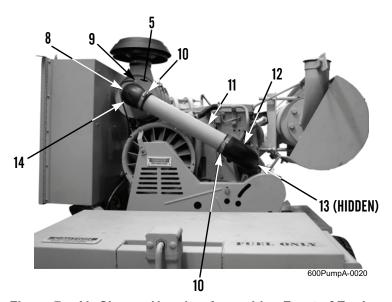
Air Cleaner Housing Assembly - Front of Engine.
